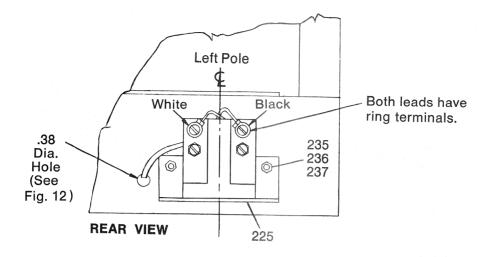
Mounting of 4th-wire neutral sensor disconnect block on drawout breaker (when used). See fig. 15.
